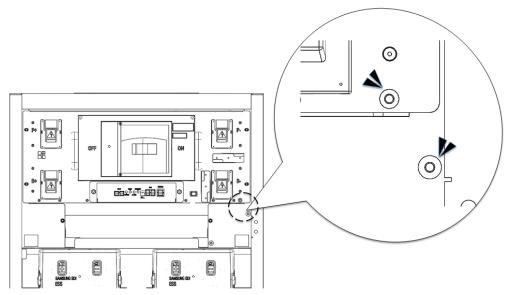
Ground Cable Connection to the Switchgear Assembly
